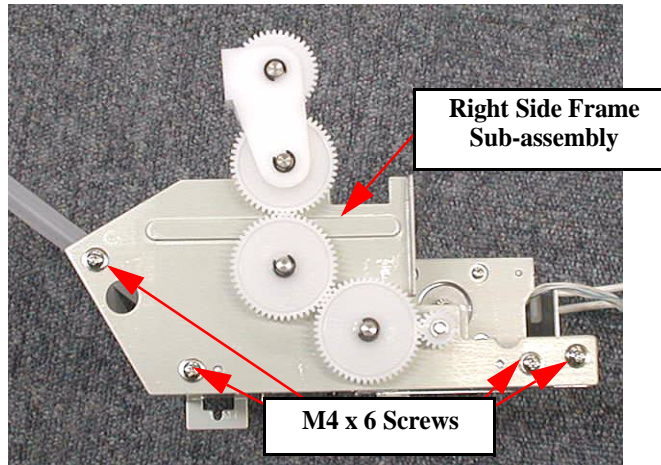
Removing the Right Side Frame Sub-assembly.
